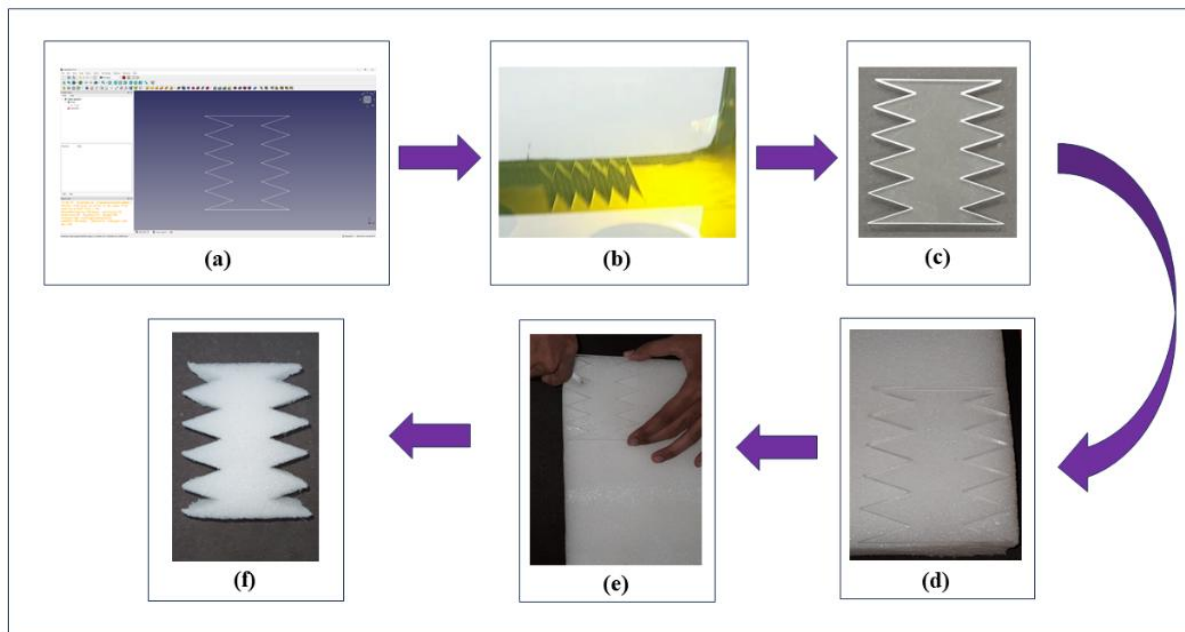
The stages involved in the manufacturing of the module (a) Computer-aided drafting of the module design (b) Laser cutting of the template on the acrylic sheet (c) The fabricated acrylic sheet that is to be used as a template (d) Fixing the template on the EPE temporarily (e) Cutting out the modules using a sharp paper cutting knife (f) The fabricated module.
